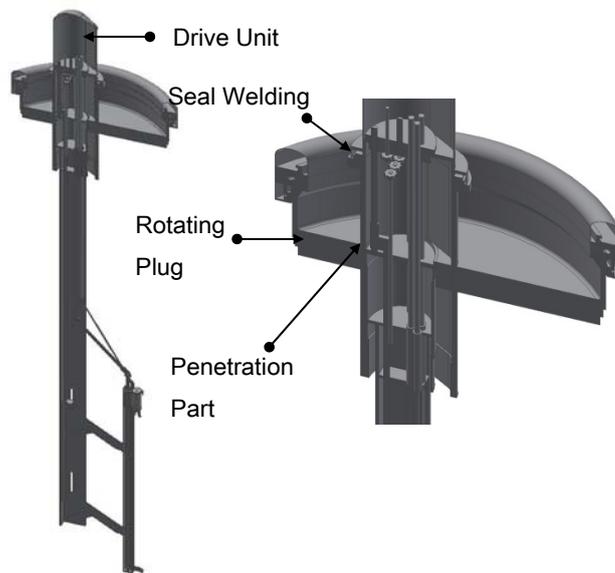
IVTM penetration and seal welding part in PGSFR
